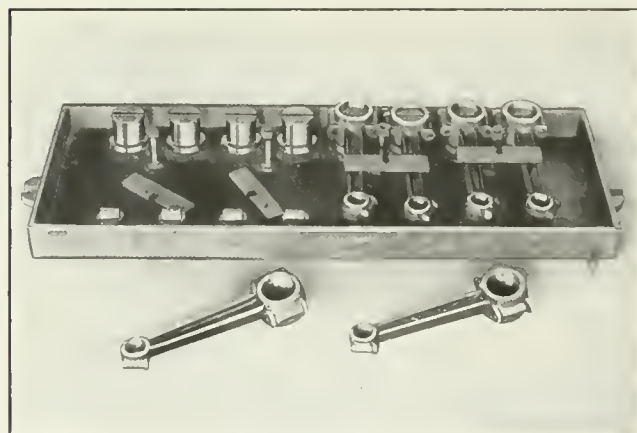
Milling Jig used in Splitting the Connecting-rod Case into Two Pieces
